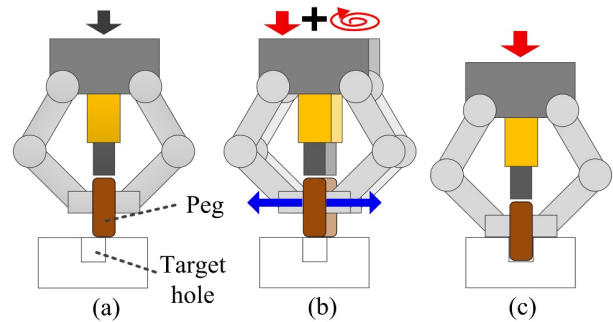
Peg-in-hole assembly process: (a) positioning, (b) searching, and (c) inserting.
